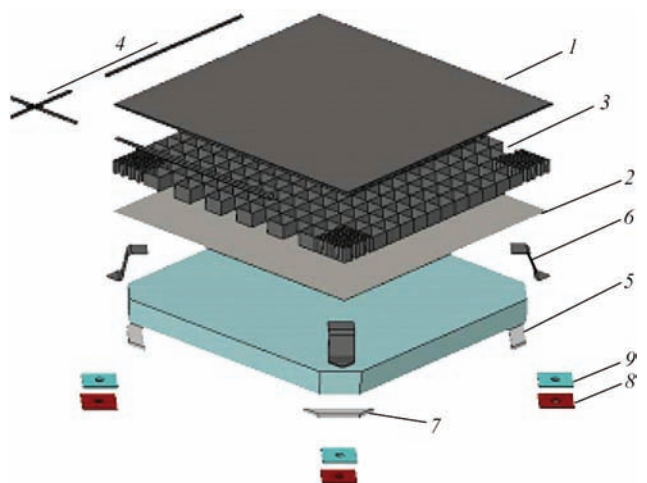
General view of TPS tile: 1 — panel upper skin; 2 — panel lower skin; 3 — honeycomb core; 4 — U-shaped stampings; 5 — thermal insulation; 6 — Z-shaped metal posts of fastening system; 7 — felt substrate; 8 — damping gasket from heat-resistant rubber; 9 — thermostat
